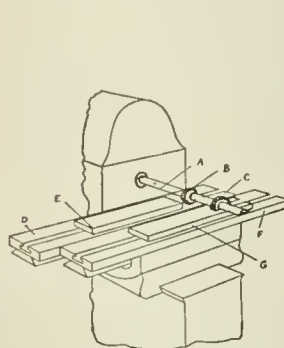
KNEE TYPE OF MILLING MACHINE WITH TWO TABLES
